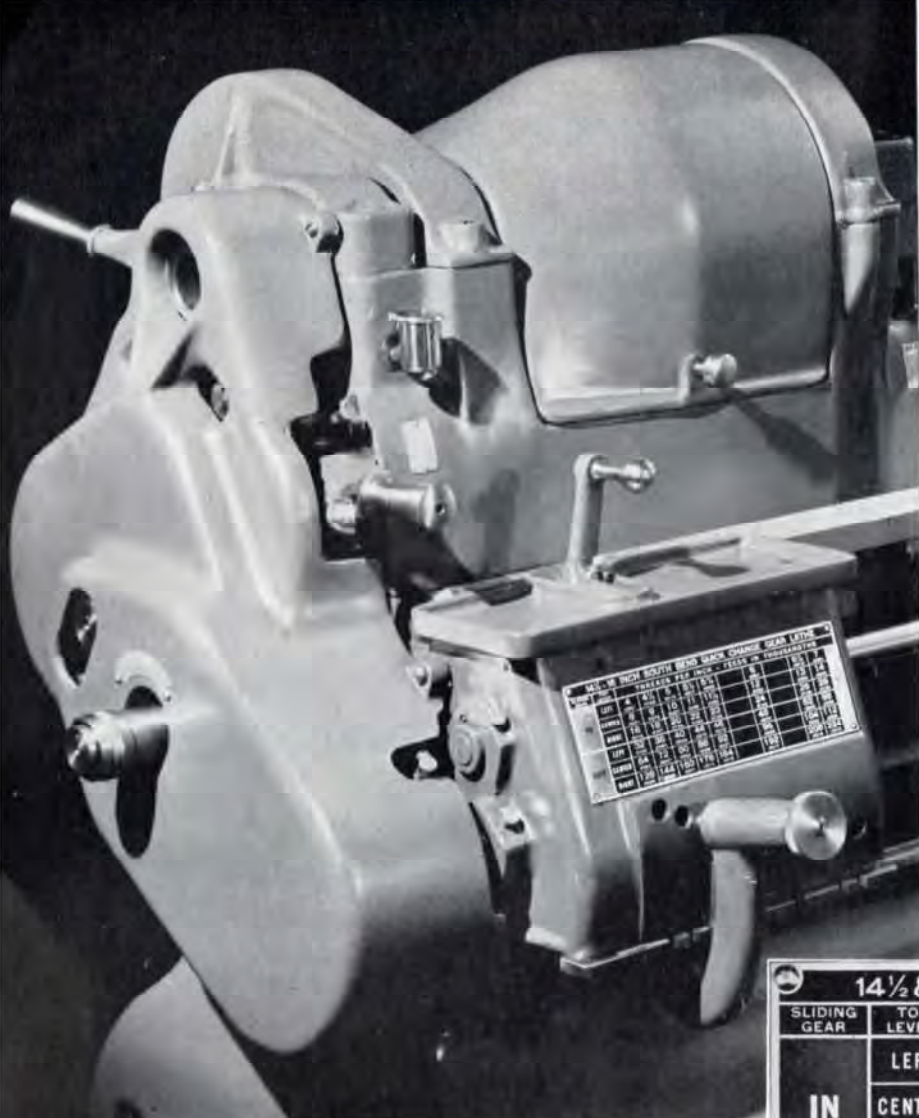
Quick Change Gear Mechanism for 10-inch and Larger South Bend Lathes
